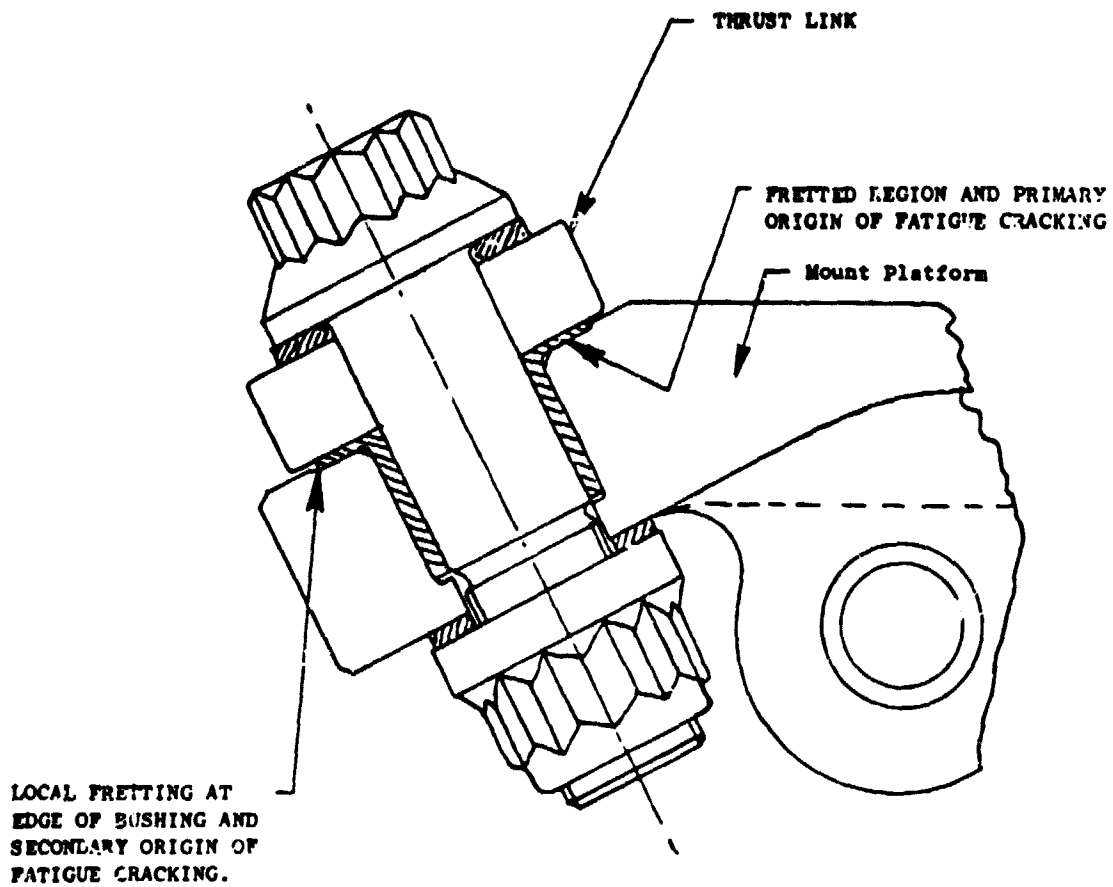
Cross Section of Left Lug of Mount Platform and Thrust Link Showing Origin of Fatigue Cracks.
